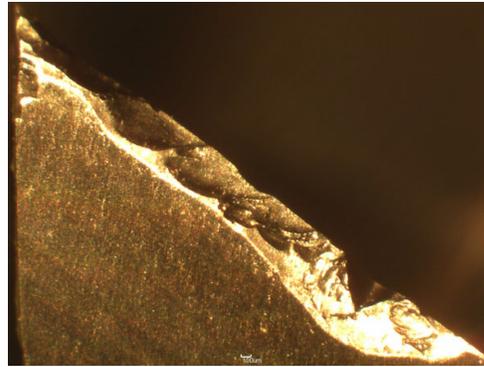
Tool flank wear for treatment 36 m/min and 0.15 mm/rev
